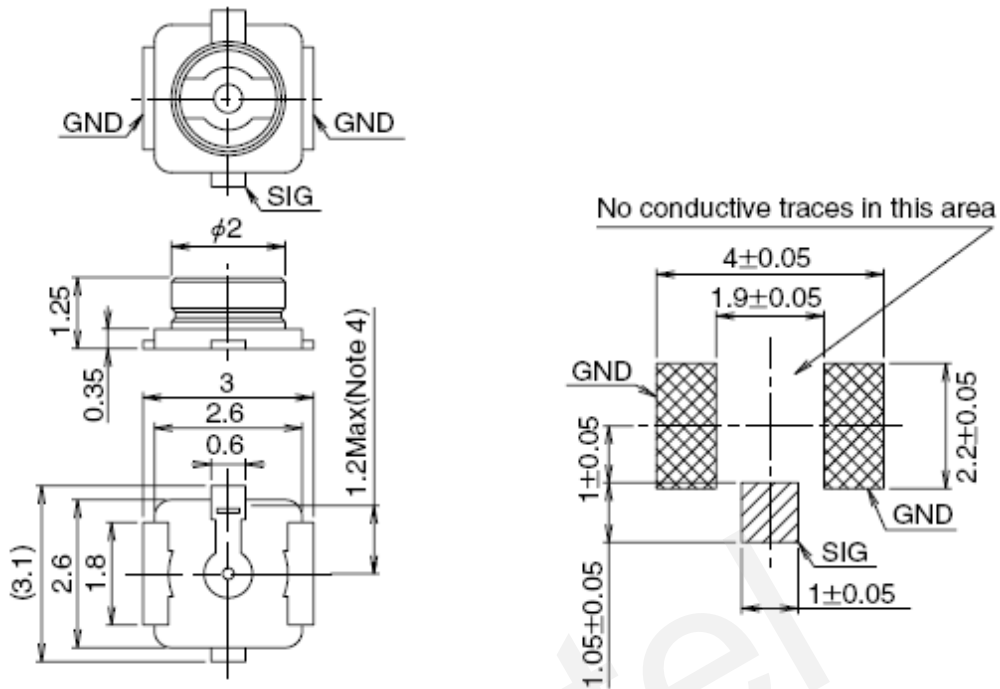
Dimensions of the UF.L-R-SMT Connector (Unit: mm)
